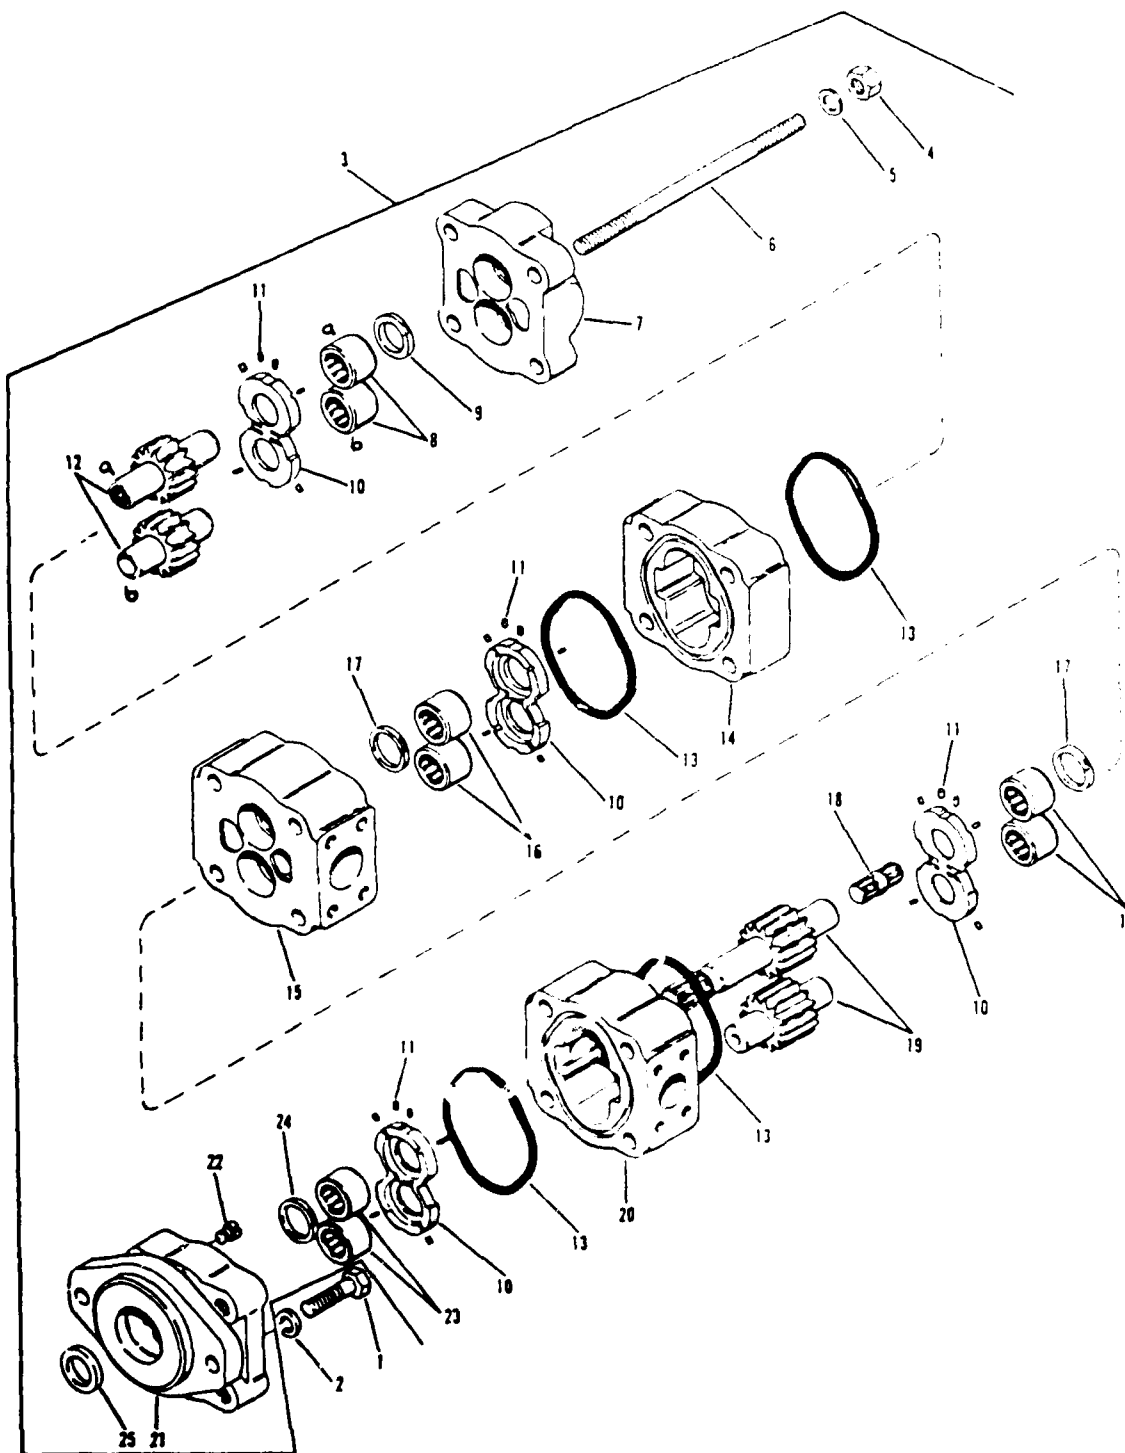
View of Disassembled Two-Section Gear Pump from Front Loader
